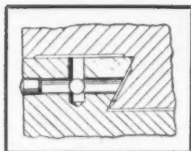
Drawing showing a pin assembled in a cross-drilled hole designed for lubricating a dovetail arrangement.
